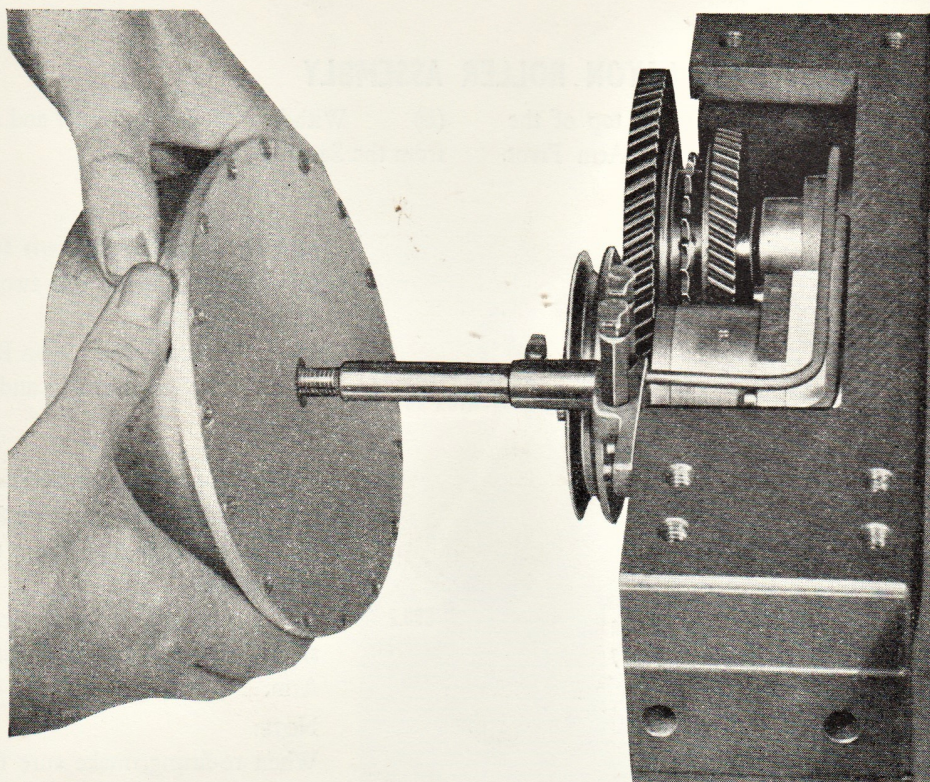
TAKE CARE WHEN REMOVING FLYWHEEL
